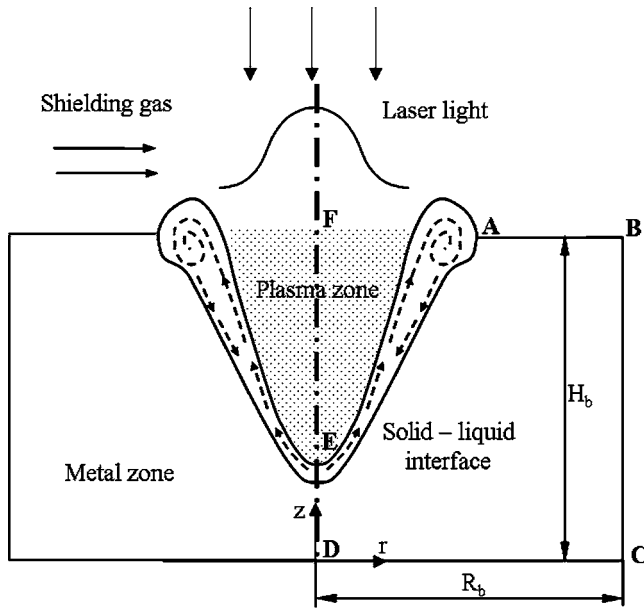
Experimental setup and schematic sketch of static keyhole laser welding process
